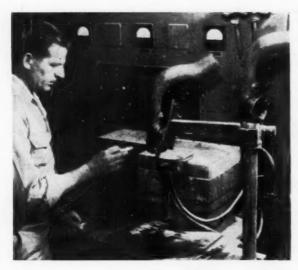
Induction silver soldering retainer rings. Operator solders 132 rings in 3 hours, 45 minutes. Torch silver soldering retainer rings to section ends used to require over 8 minutes per section. With the induction furnace a bond is obtained every 26 seconds.
